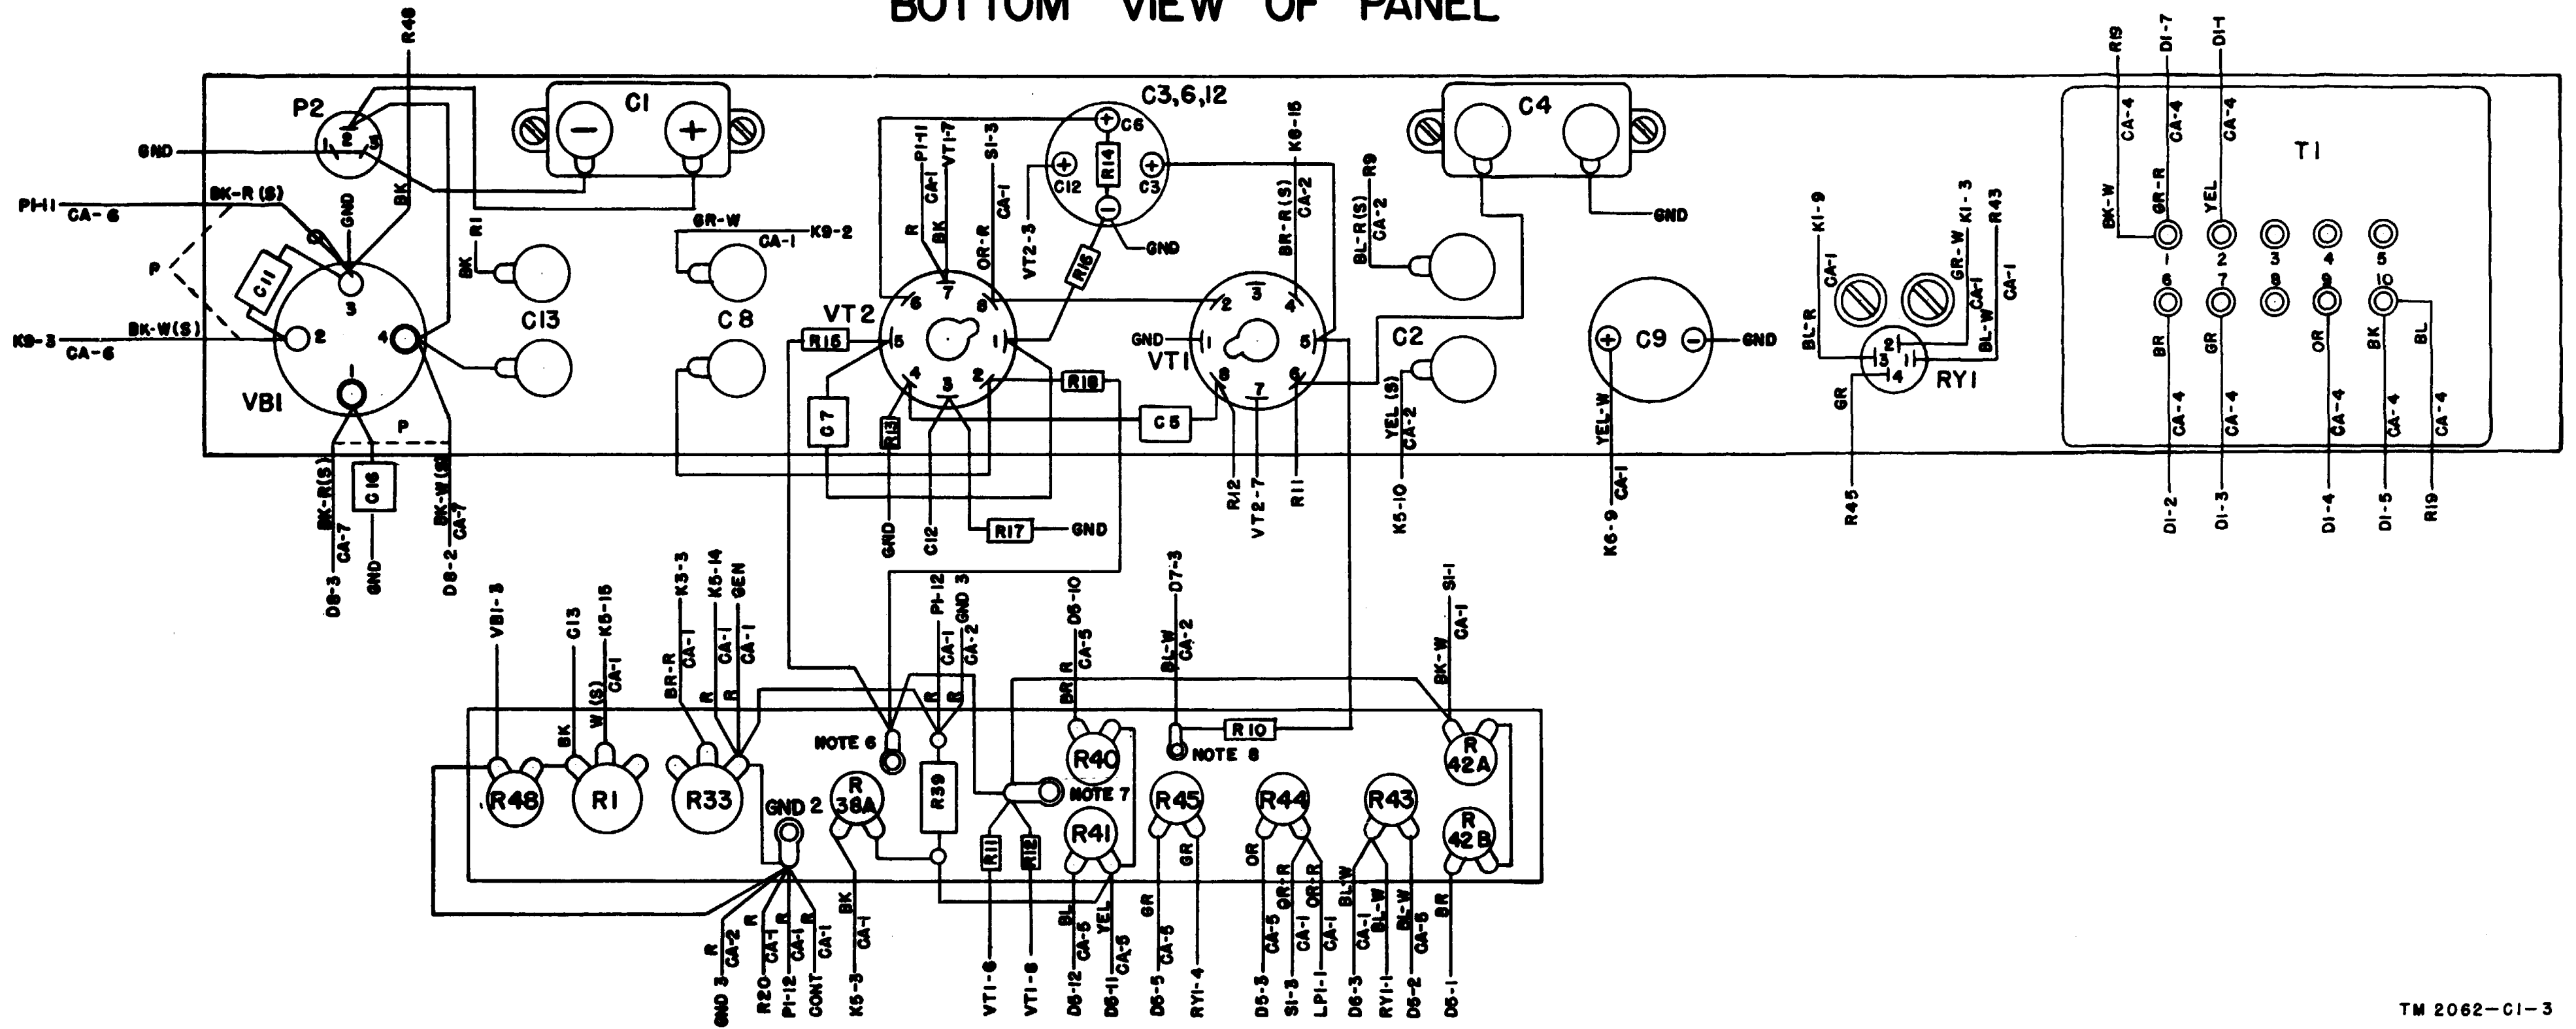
(Added) Test Set I-142-B, bottom view of panel, wiring diagram.
